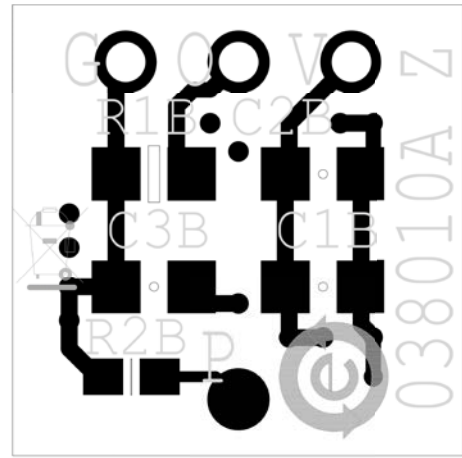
ADPD2212 Evaluation Board Bottom Layer
